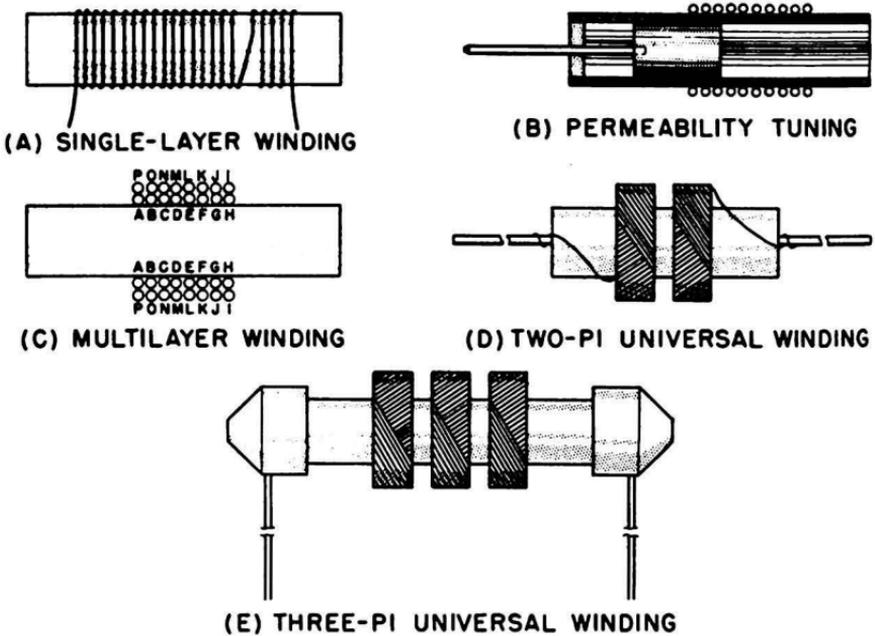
Typical coil windings. (A) Single-layer (solenoid) winding. (B) Permeability tuning. (C) Multilayer winding. (D) Two-pi universal winding. (E) Three-pi universal winding. Courtesy National Co., Inc.
